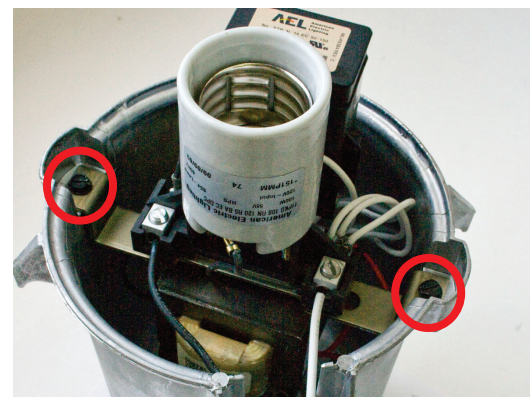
Remove the two screws that secure the socket, ballast and starter to the housing.
